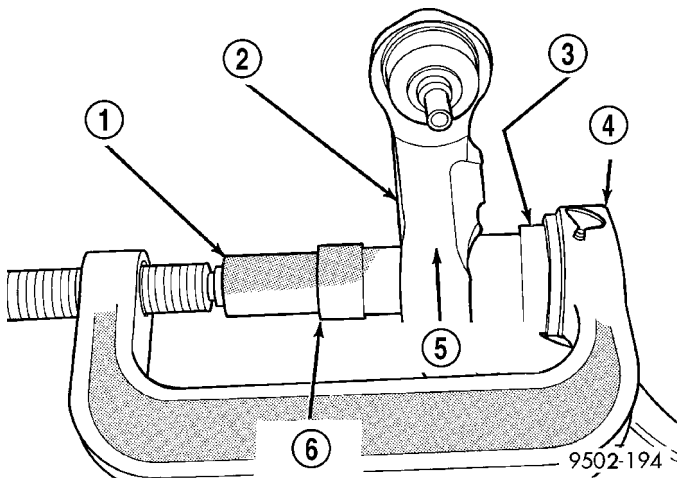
Installing Clevis Bushing In Lower Control Arm
